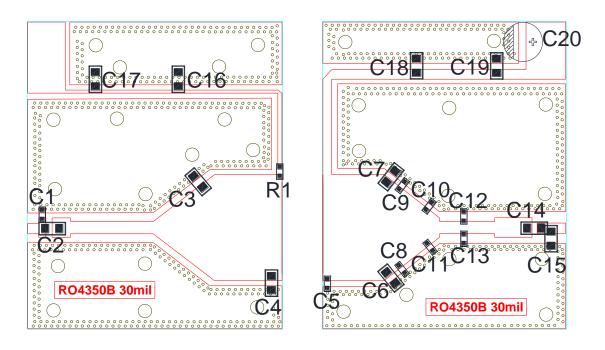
Test Circuit Component Layout (1500-1700MHz)
